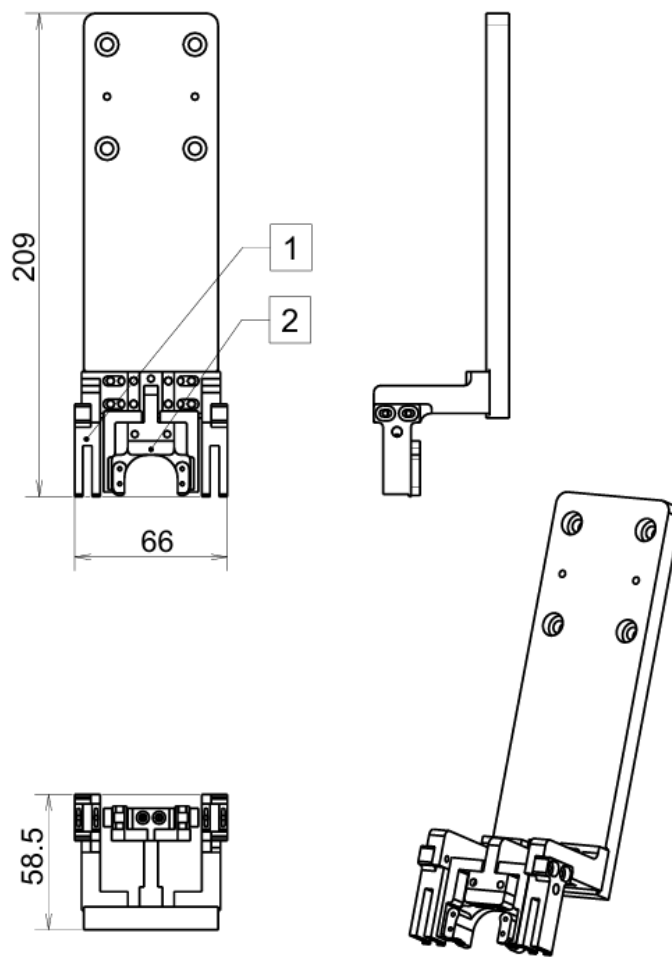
Technical parameters of tape suction mechanism design 2.
